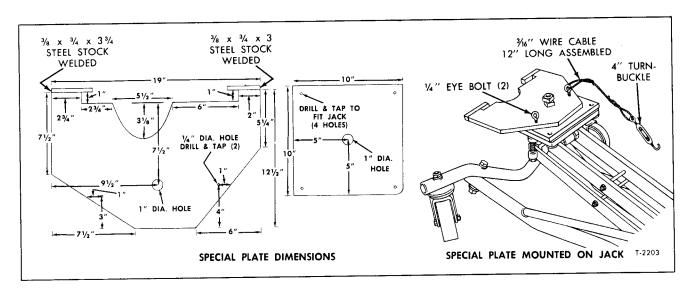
Special Jack Adapter Plates for Removing Differential Carrier
